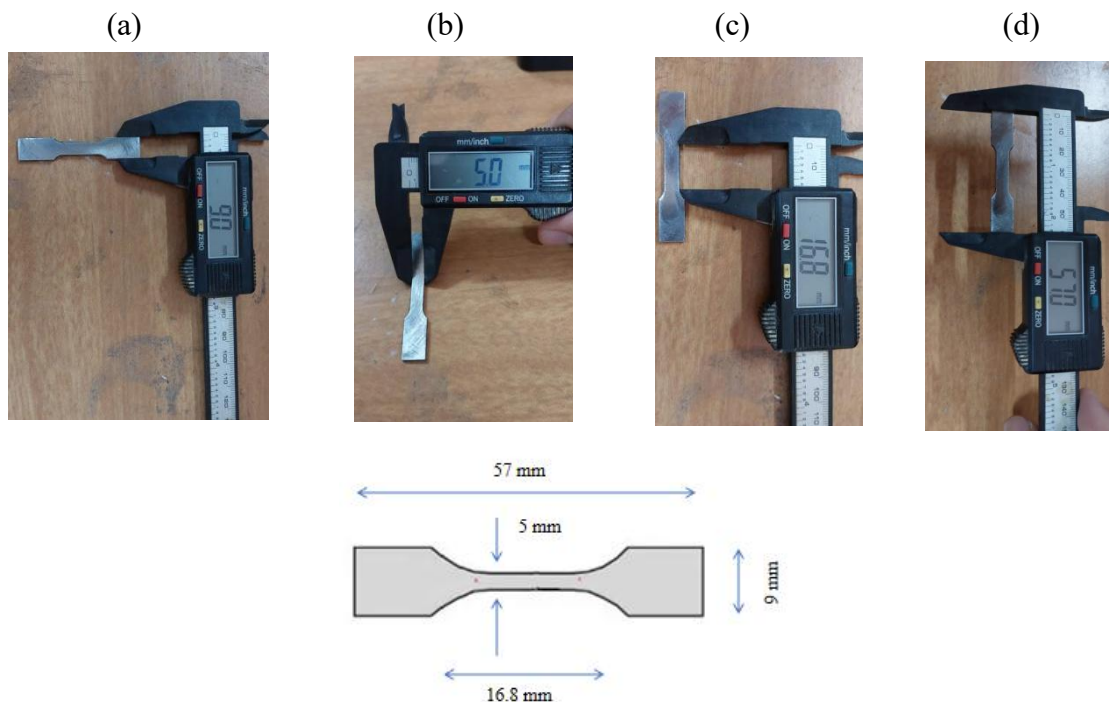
Dog bone specimen for tensile test with dimensions (a) 9.00 mm breadth, (b) 5.00 mm guage breadth, (c) 16.80 mm guage length, (d) 57.00 mm length of specimen
